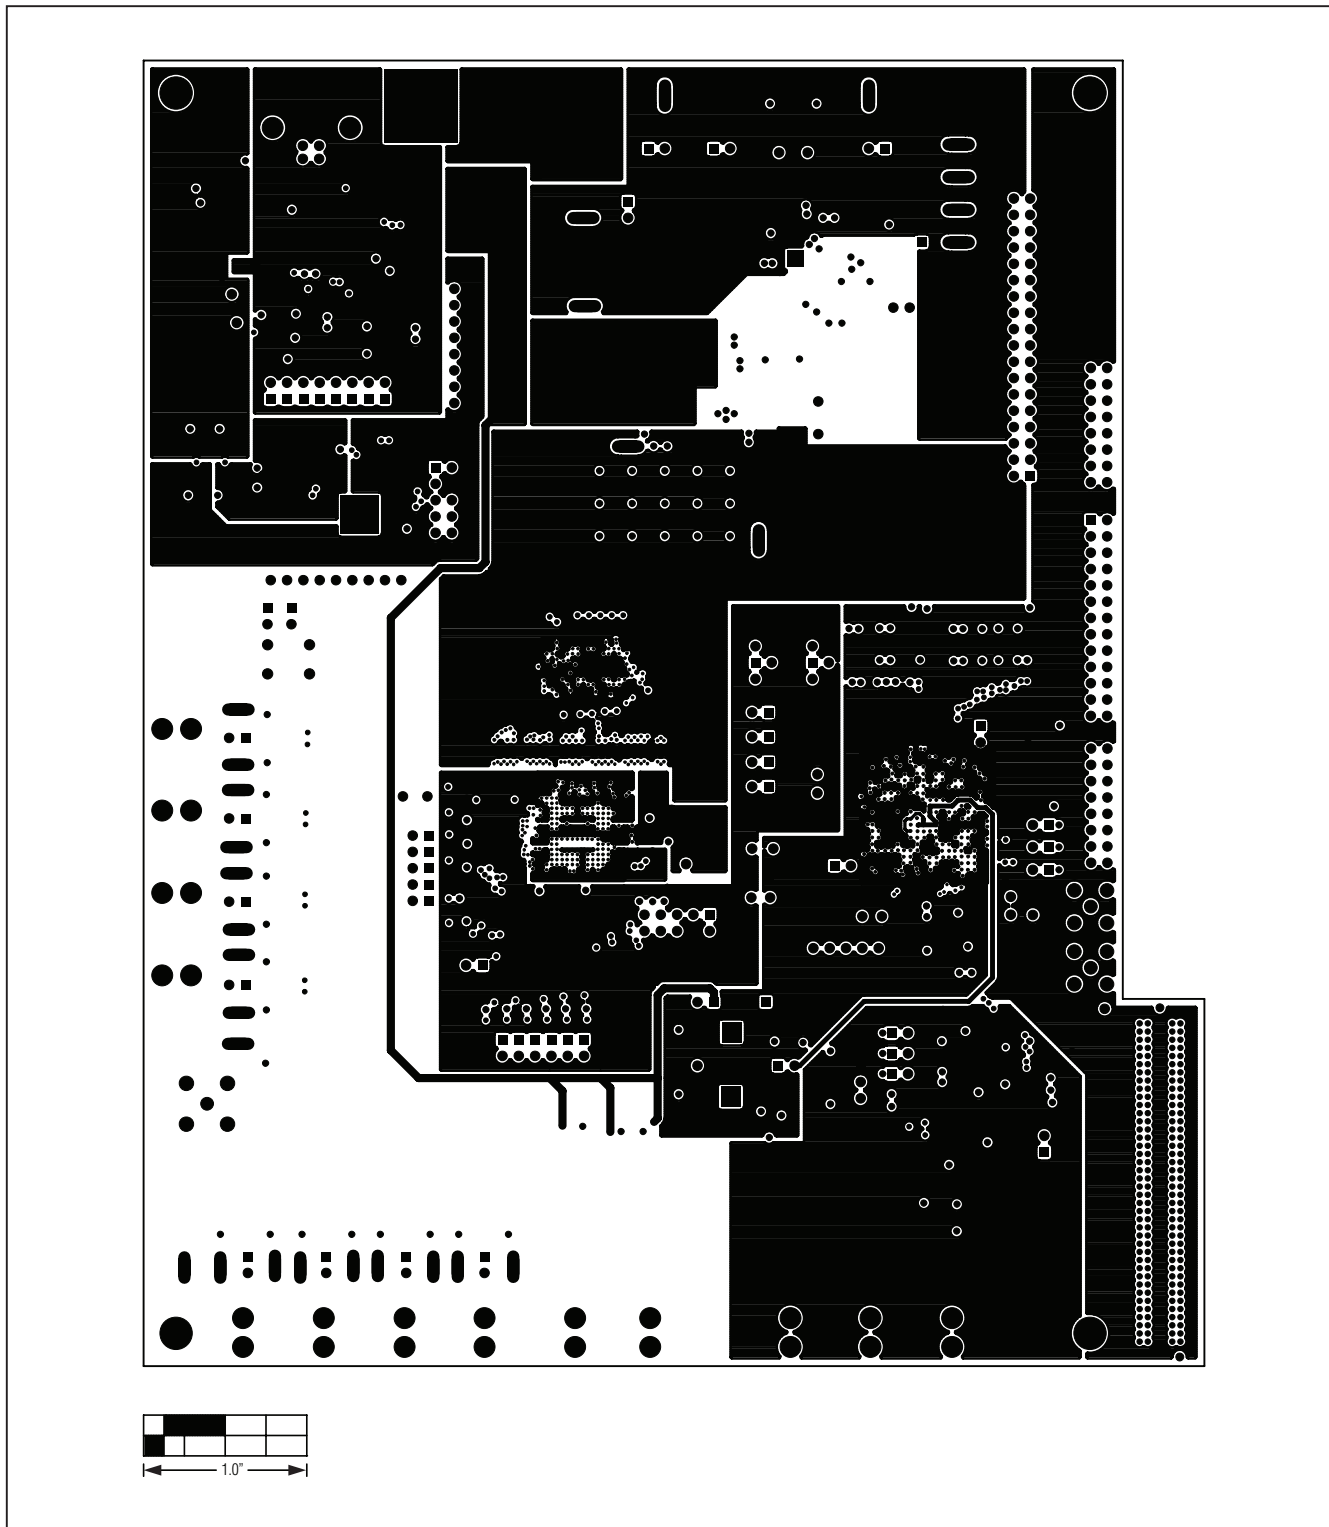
MAX9530 EV Kit PCB Layout—Layer 5
